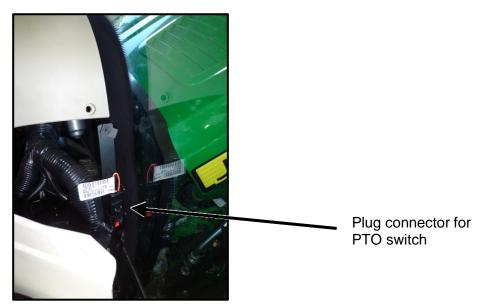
Cable for engine PTO shaft (tractor with cab)
